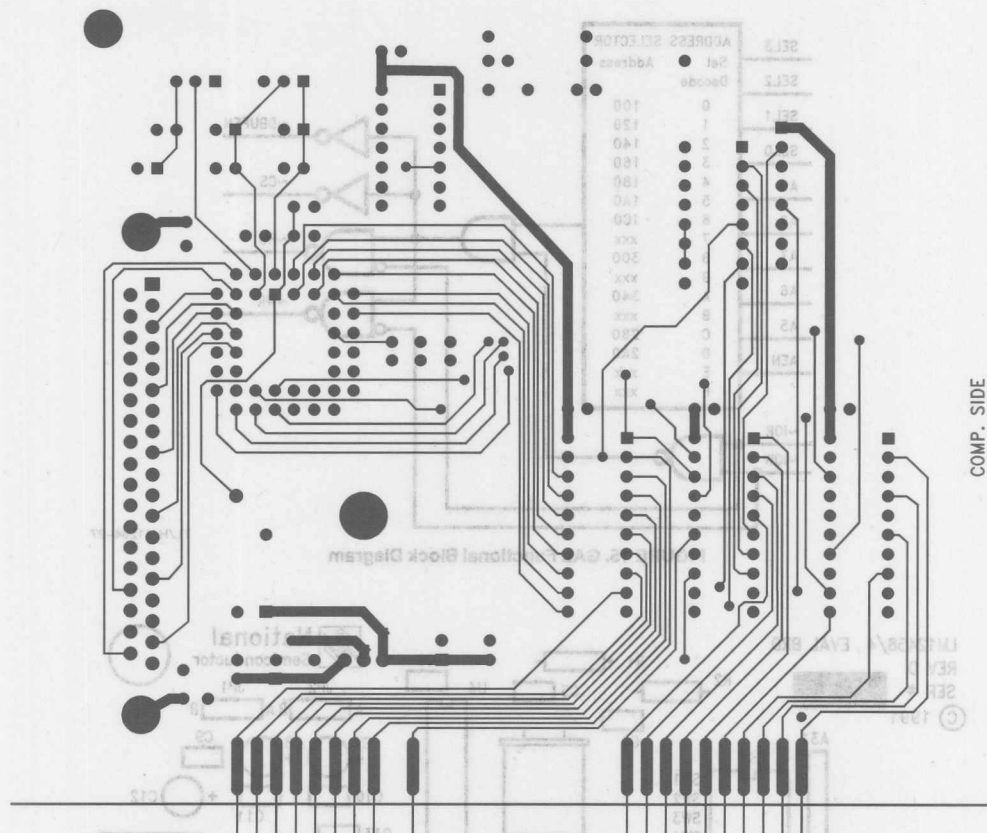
LM12(H)454/8 Evaluation/Interface Board Component-Side Layout Positive
